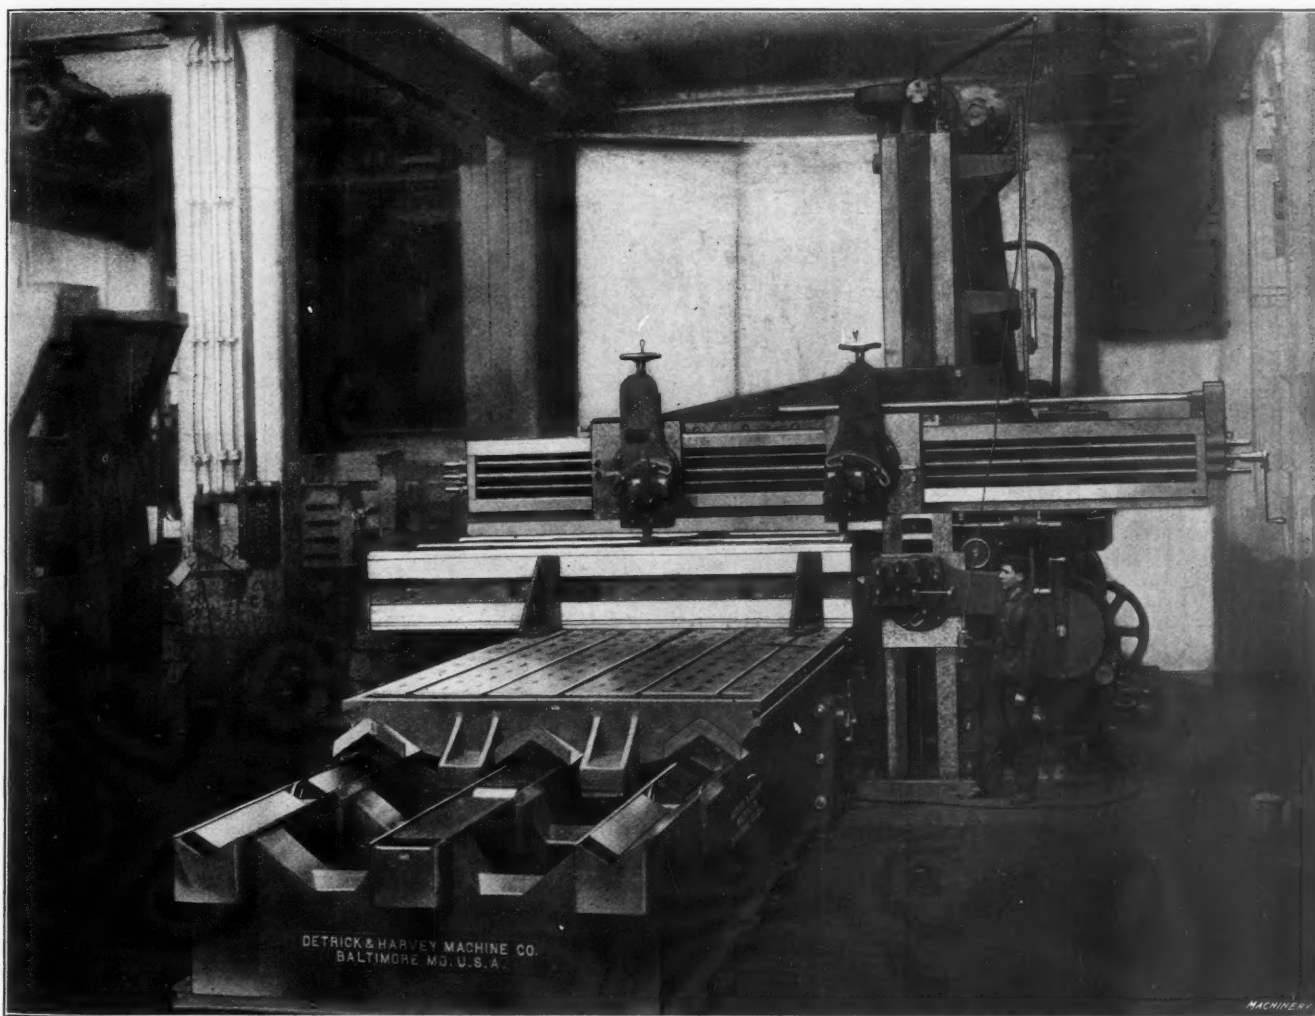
Detrick & Harvey Convertible Planer, with Auxiliary Housing removed for Use as an Open-side Planer
